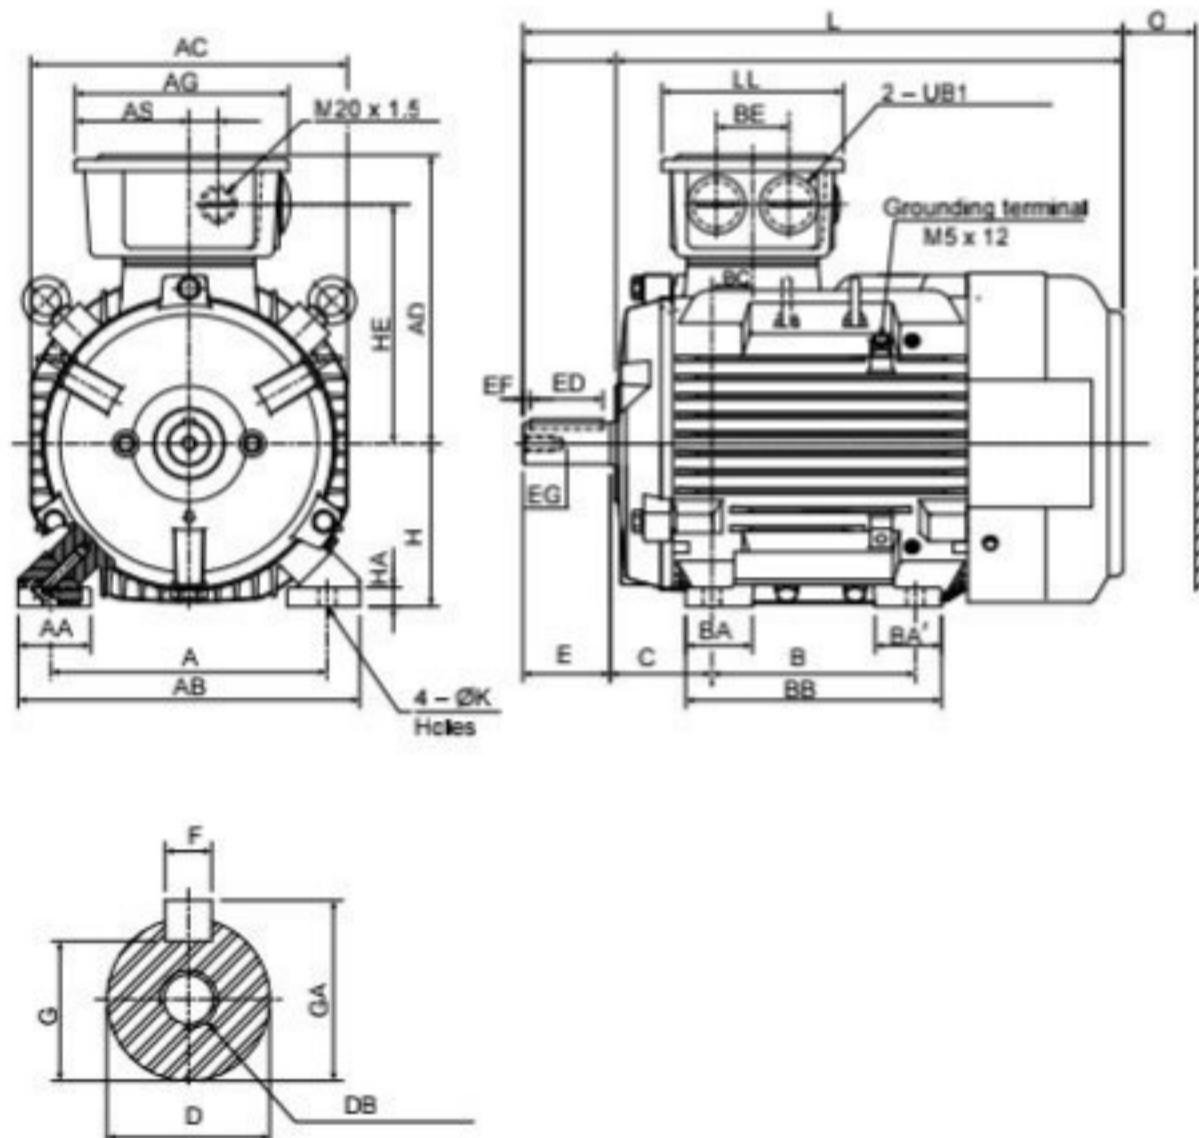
Outline drawing of cast iron design, feet version, mounting B3; frame size 80 – 112
